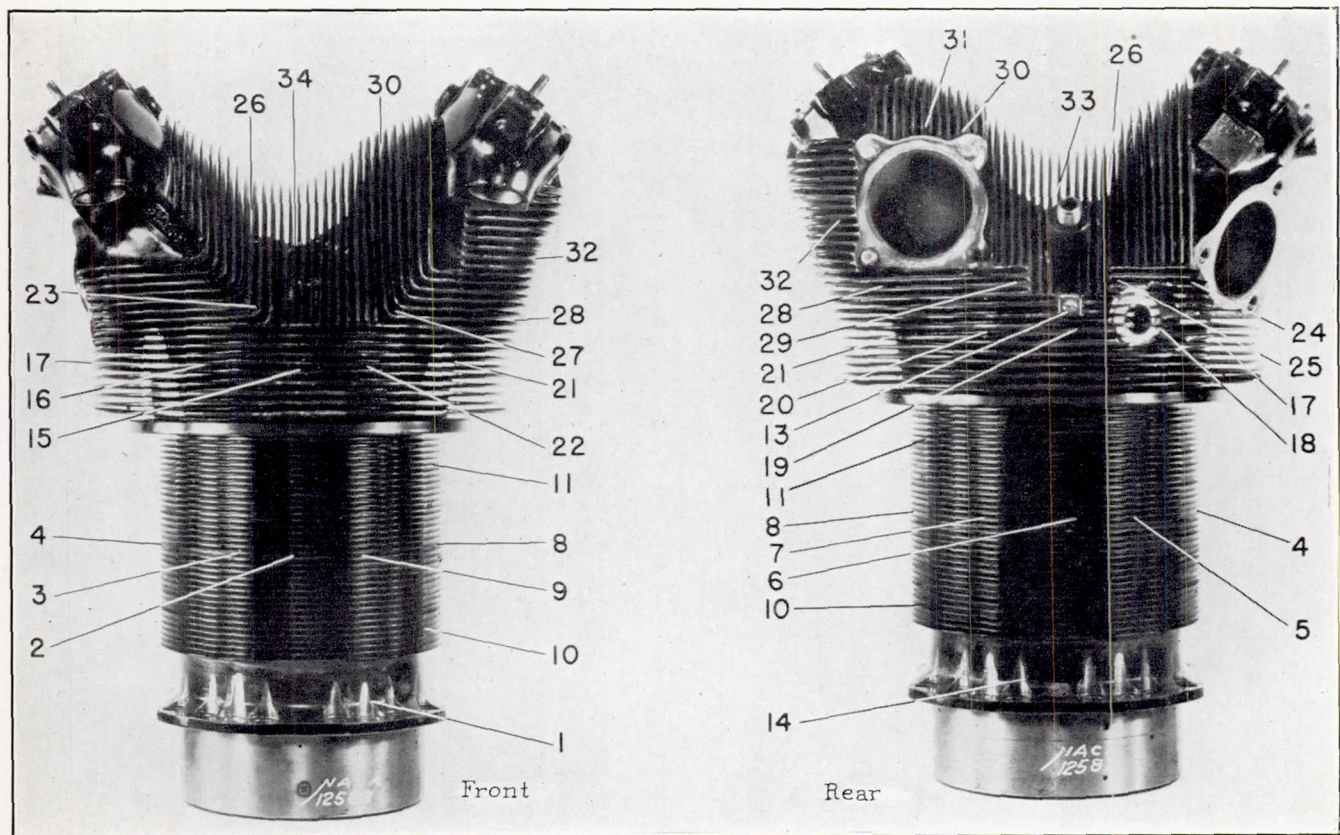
The 1820-G cylinder showing location of thermocouples.
